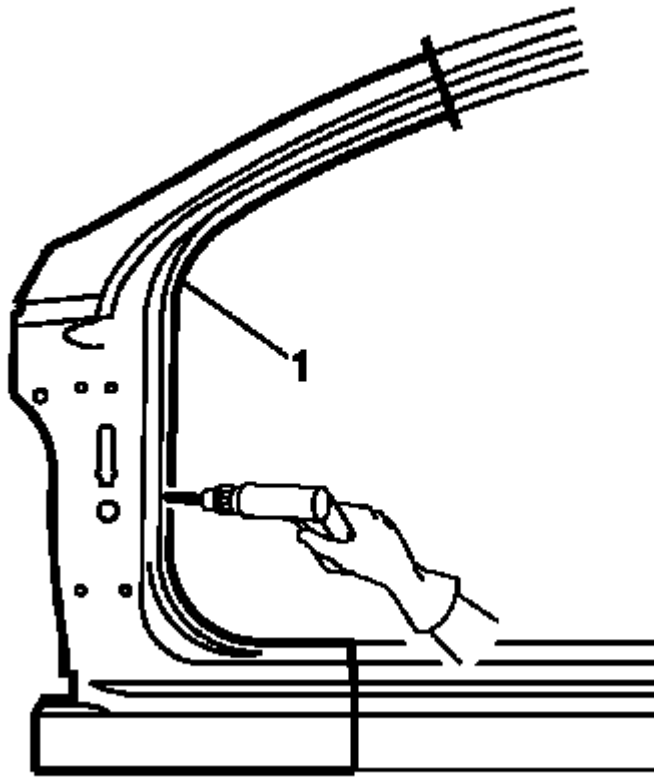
Drilling 8 mm (5/16 In) Plug Weld Holes In Service Part
